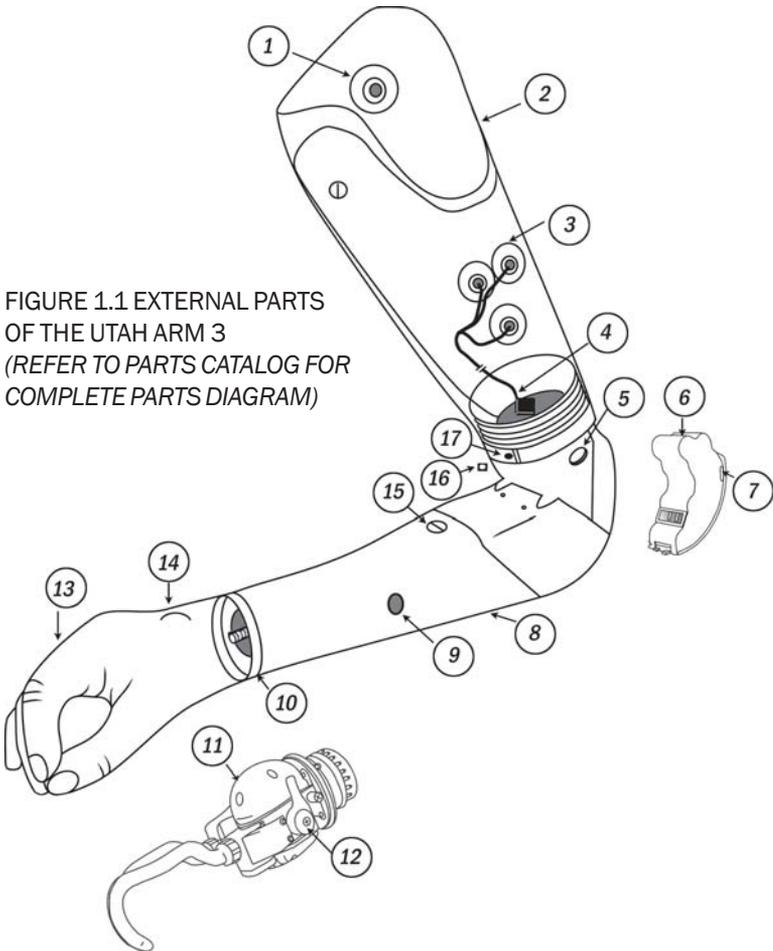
EXTERNAL PARTS OF THE UTAH ARM 3
